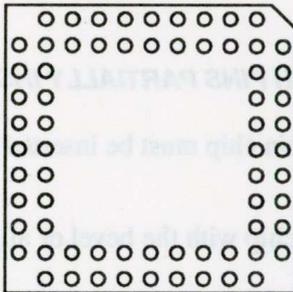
HOLE SIDE of NOTCHED 68-PIN SOCKET
